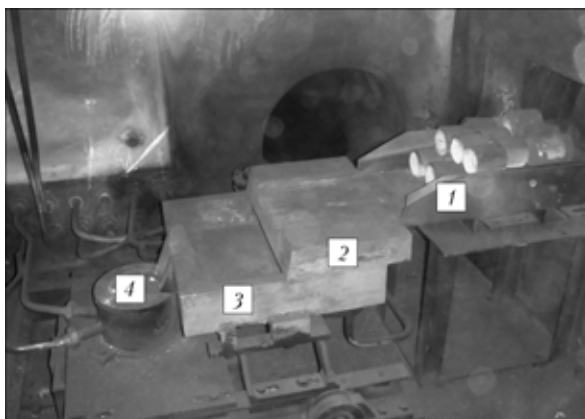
Processing chamber with rigging; 1) the box with the charge (molybdenum briquettes); 2) the top plate; 3) the intermediate container; 4) the solidification mould.
